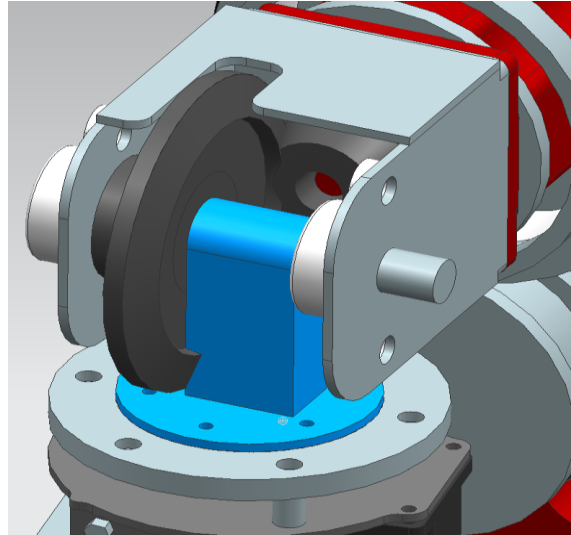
Final design of the gearbox achieves speed reduction and change in rotation direction by using beveled gears.
